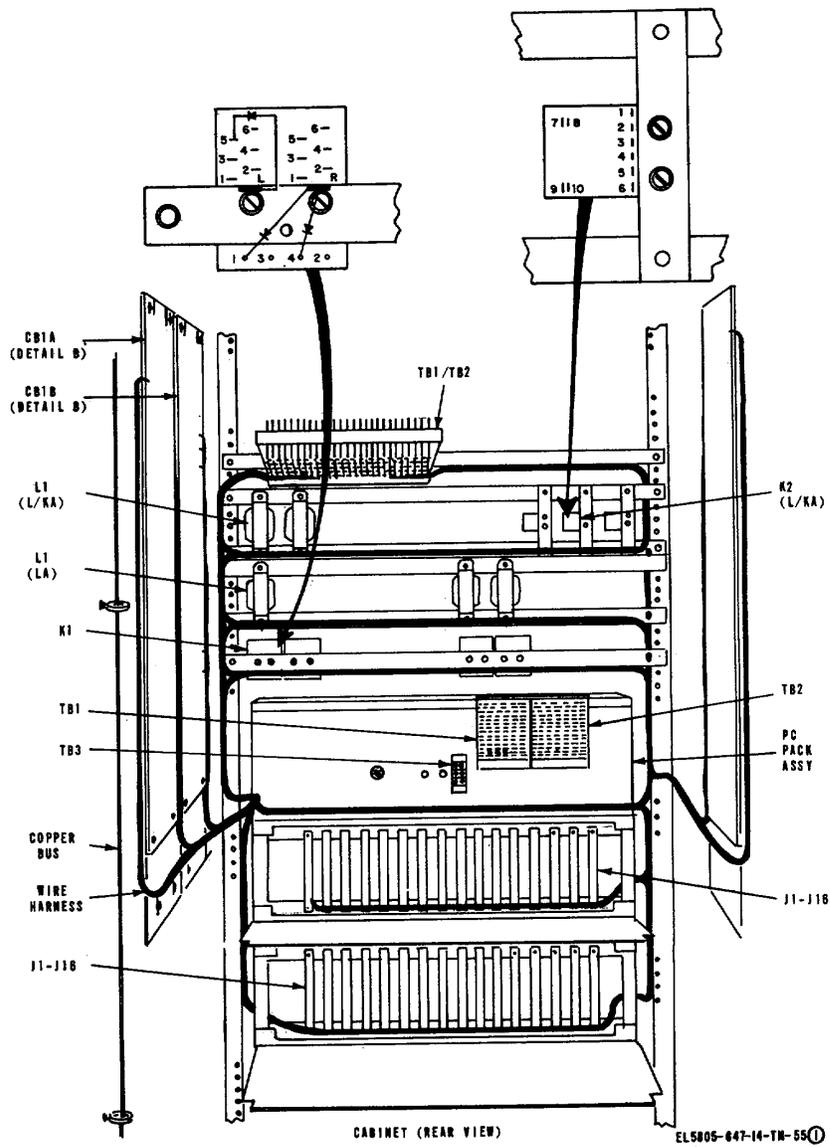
Typical equipment cabinet, subassembly parts location.
